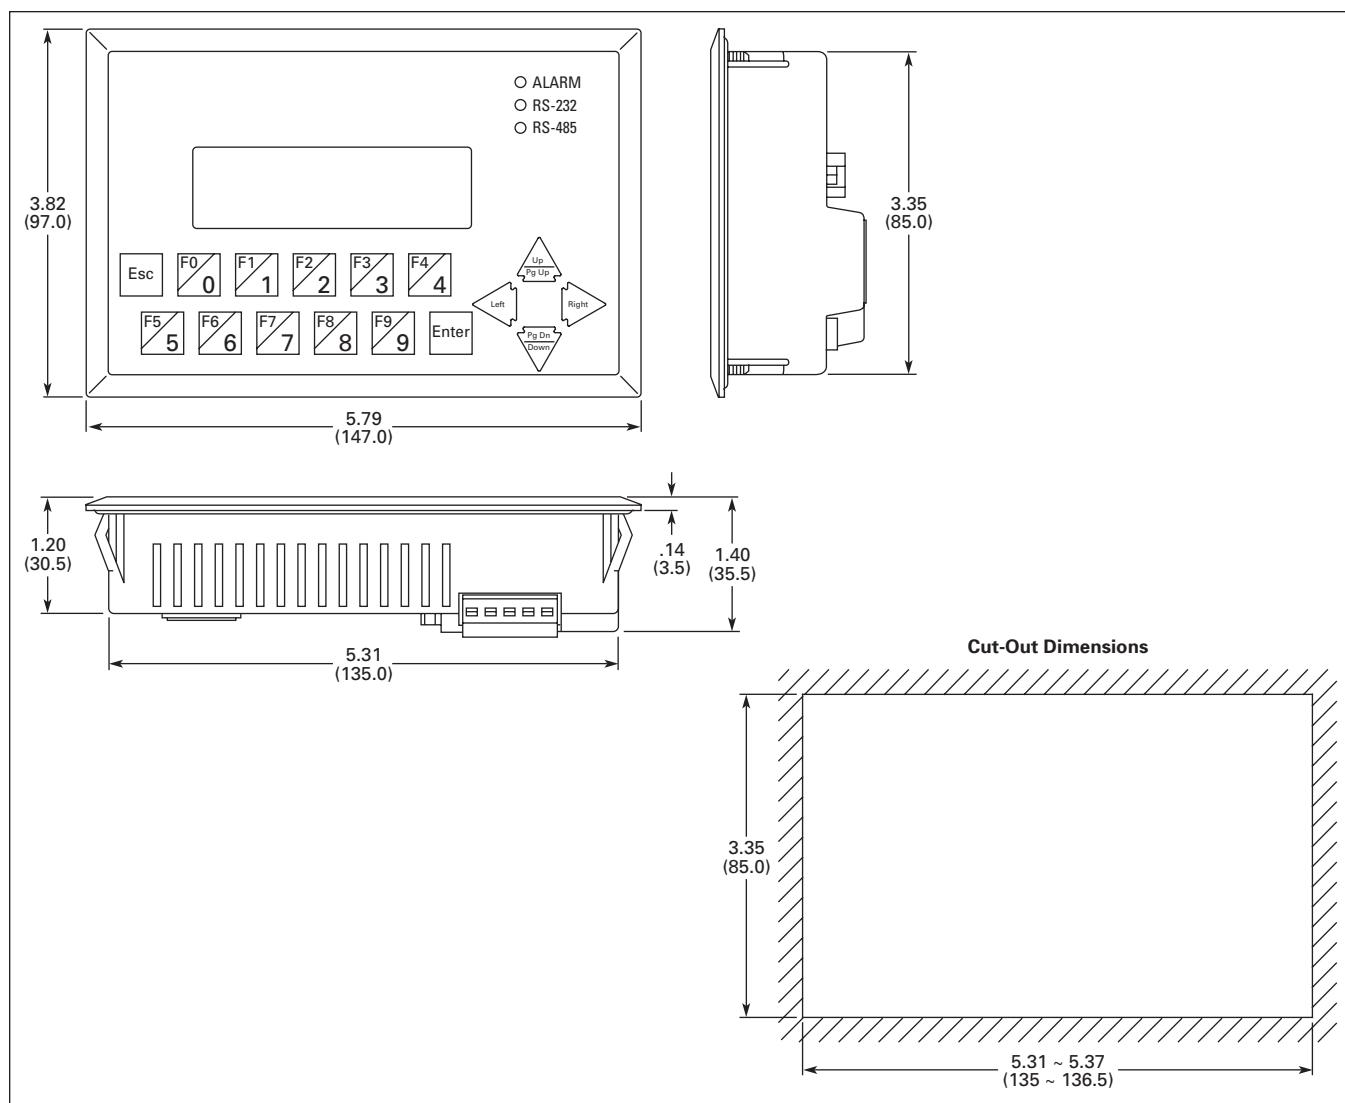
ECL-GP02 — Approximate Dimensions in Inches (mm)
